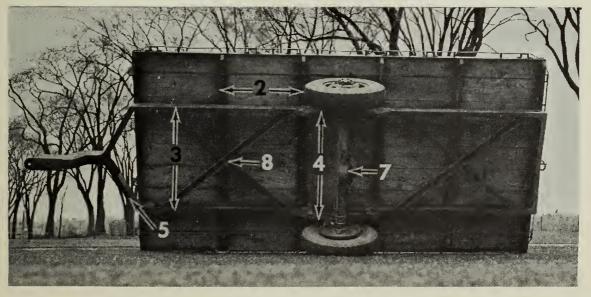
For heavy loads the trailer frame and platform should be sturdily constructed.
